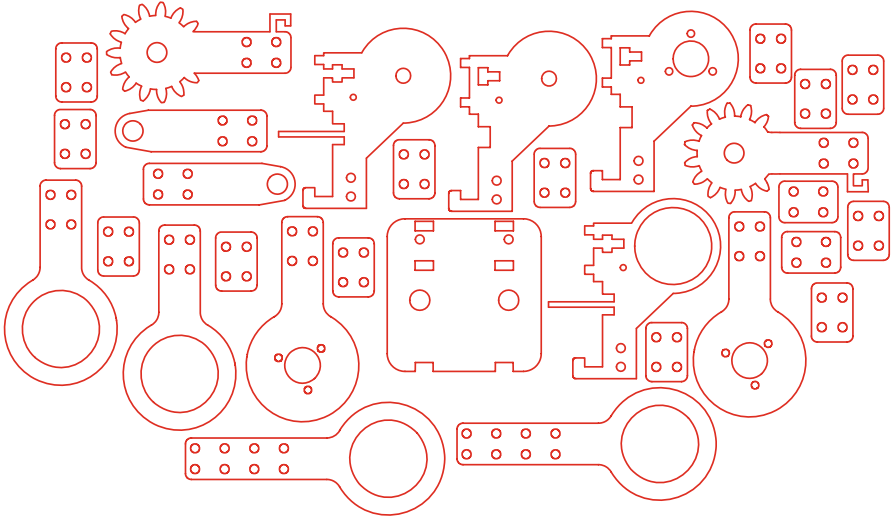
Drawing of the parts for the omnivheel prototype
